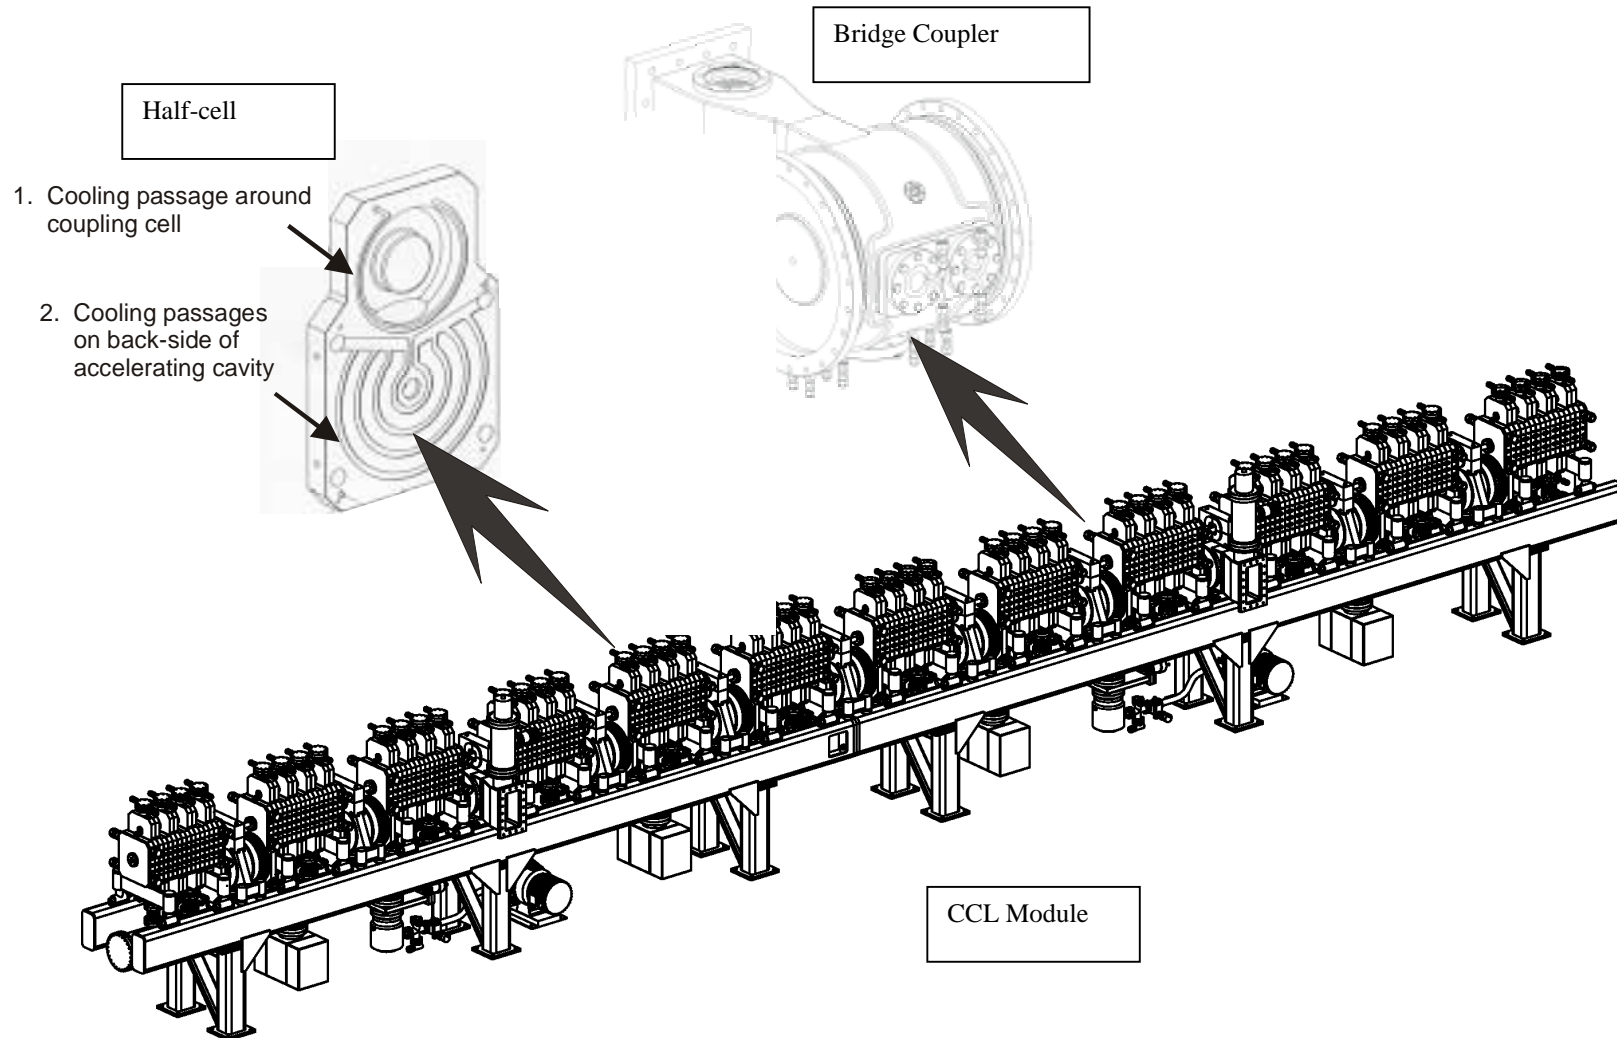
Complete assembly drawing of a CCL module with details of a half-cell and bridge coupler.
